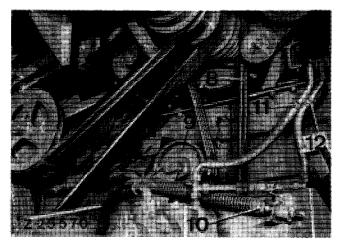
Preparing to Remove Engine (Combine with Hydrostatic Drive)
